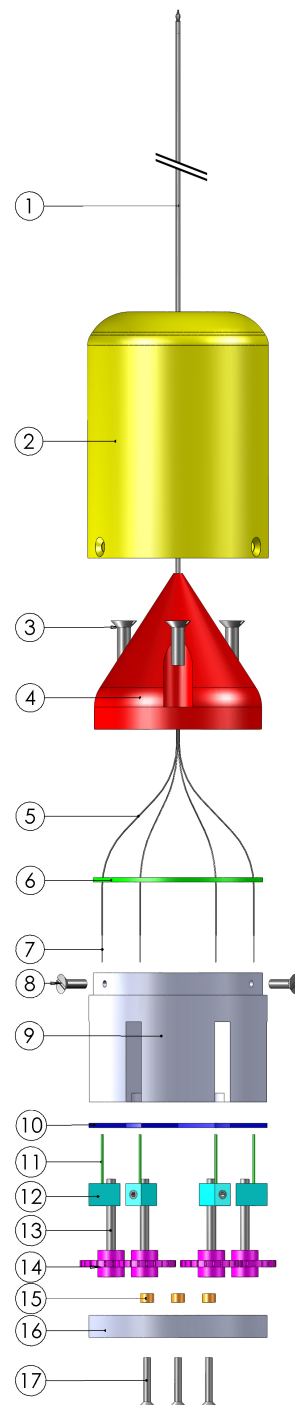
Exploded view of control unit: (1) shrinking tube; (2) protection cap; (3) bolt M3x10; (4) conical guidance cap; (5) Nitinol tube; (6) disc; (7) element; (8) screw M2x5; (9) body; (10) star plate; (11) rigid tube; (12) rectangular block; (13) lead screw M2x20; (14) wheel; (15) ring; (16) back plate; (17) screw M2x10.
